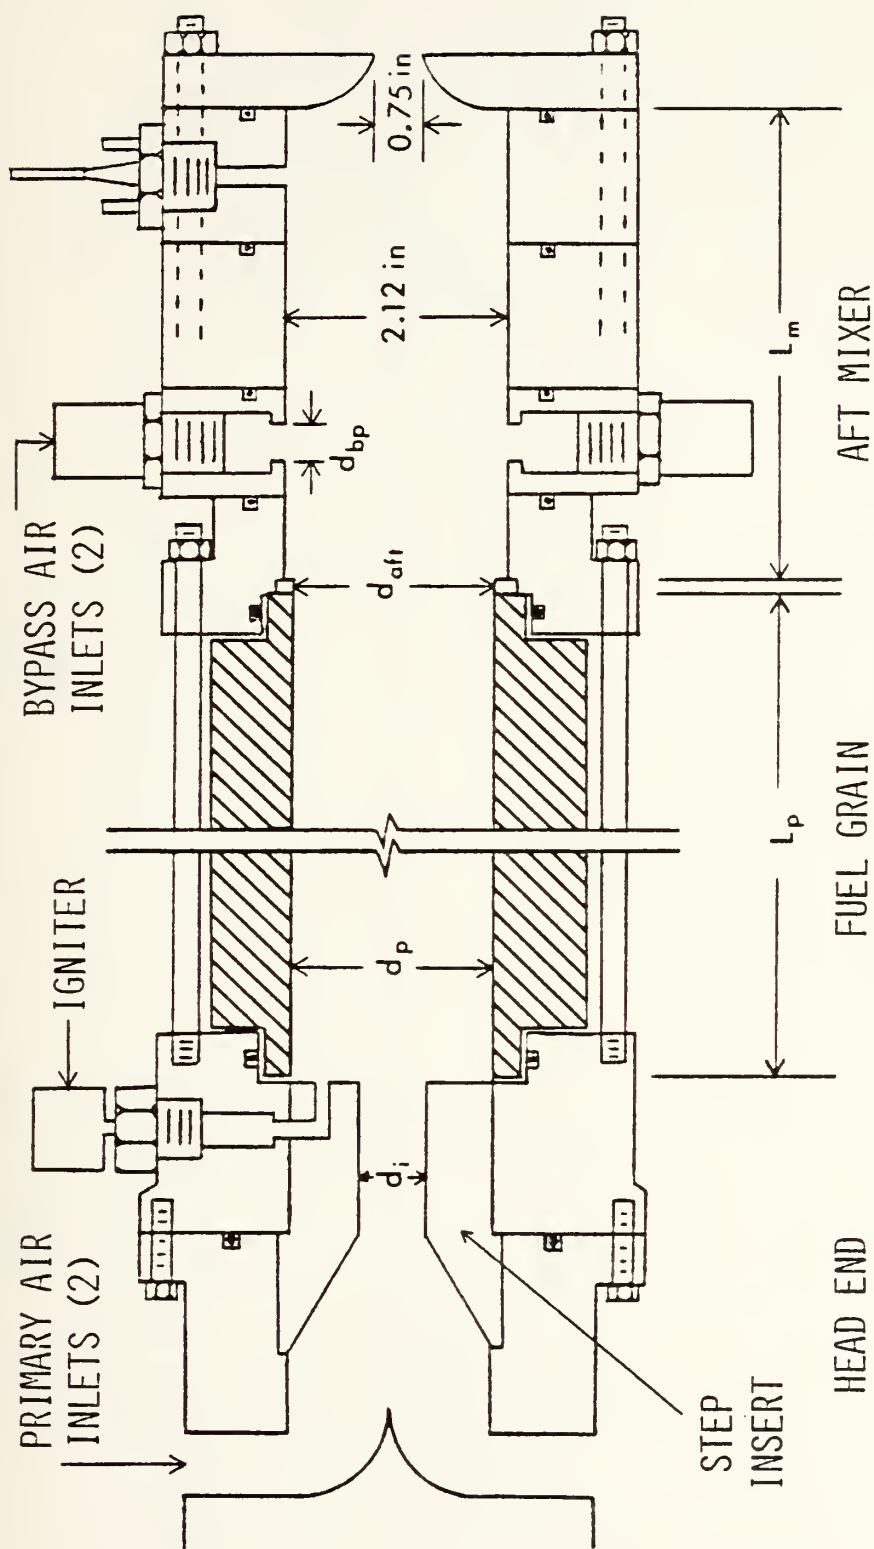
Schematic of Solid Fuel Ramjet Assembly.
